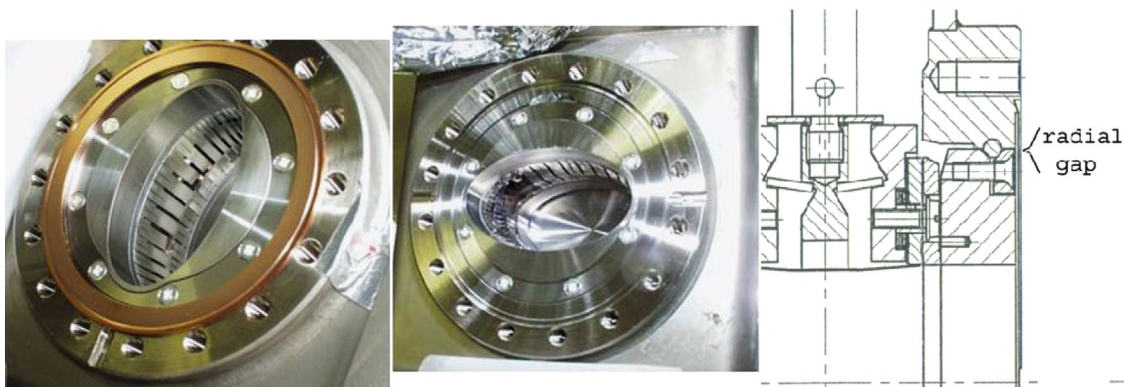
Discharges in shielding fingers of vacuum valves and geometry of the valve flange. Note damaged fingers.
